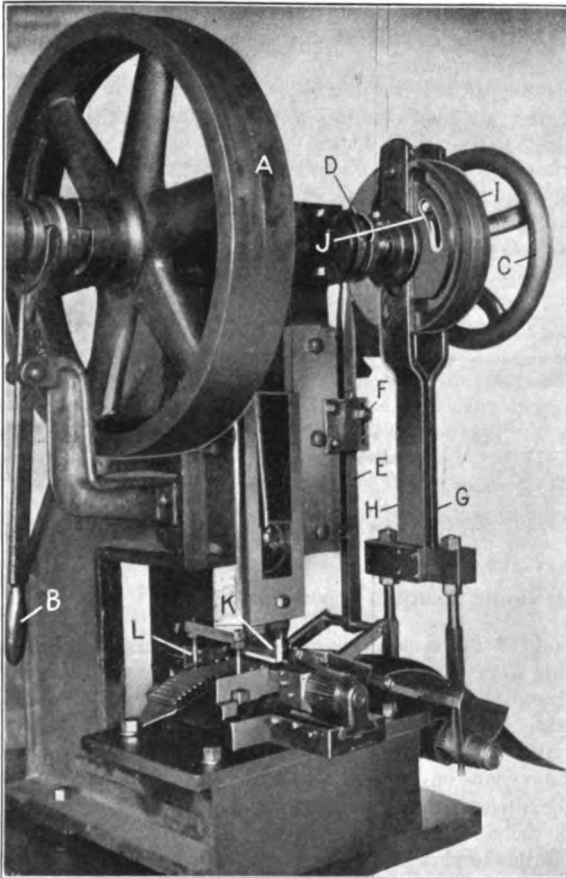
CLOSE VIEW OF MAIN WORKING PARTS
